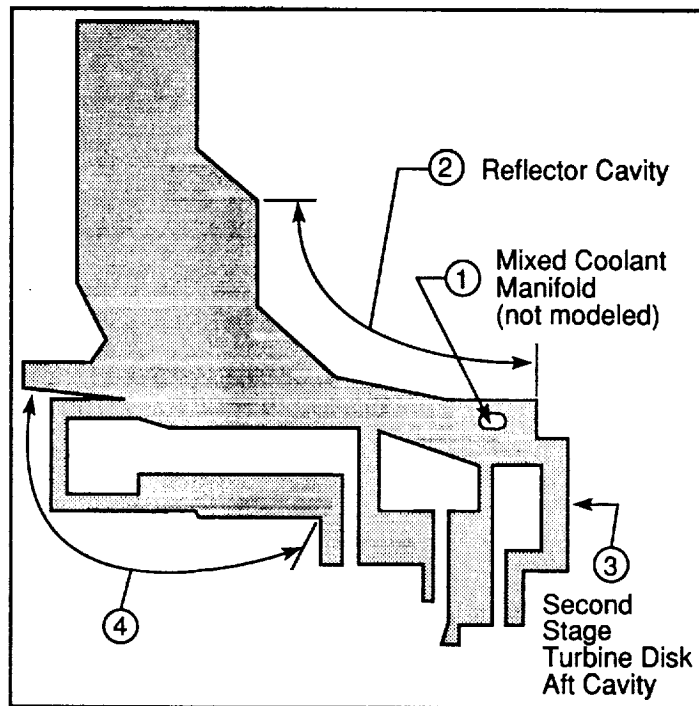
Locations of pressurized surfaces in HPOTP housing model.
